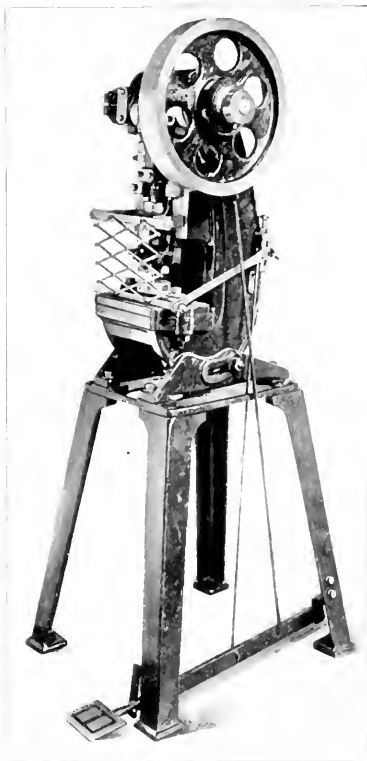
Geuder, Paeschke & Frey "Lock" Type of Guard
